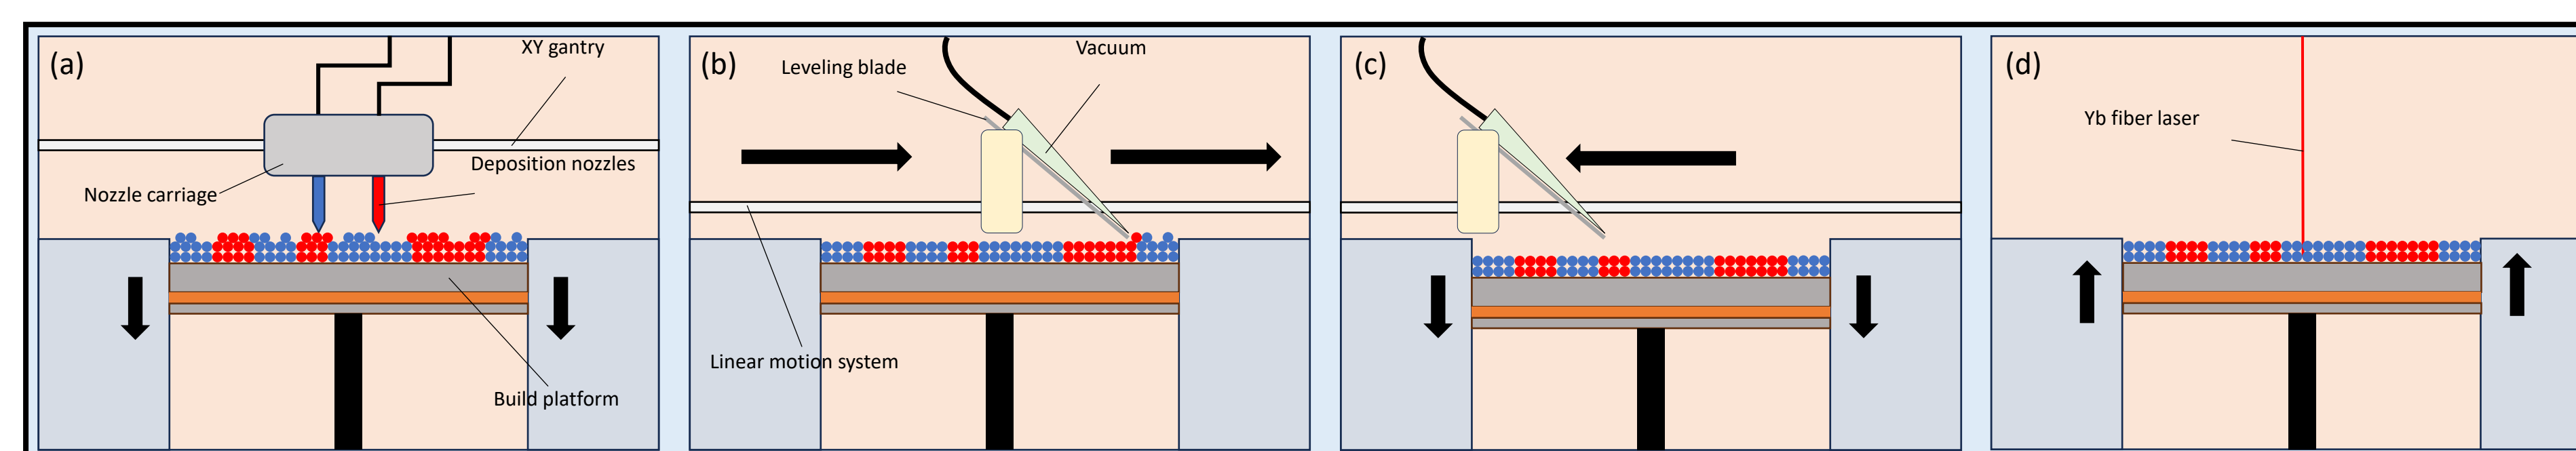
MMSLM process diagram: (a) build plate lowers one layer thickness, nozzles selectively deposit powder; (b) leveling blade smoothens out powder bed and vacuum removes excess loose powder; (c) build plate lowers one layer thickness and leveling blade retracts back to origin; (d) build plate raises one layer thickness, then selective lasing of powders commences
